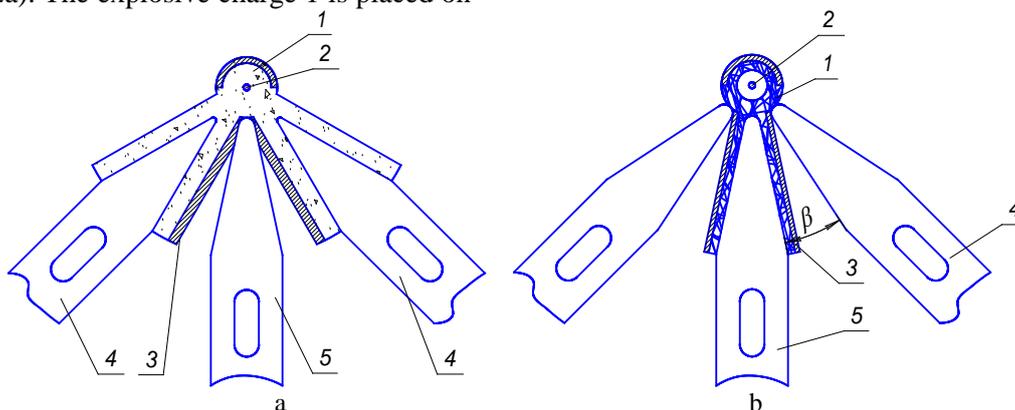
Diagram of multiple hardening of excavator bucket teeth 1 – an explosive; 2 - electric detonator; 3 - striker plate; 4 - excavator bucket teeth subjected to primary hardening; 5 – an excavator bucket tooth subjected to secondary hardening
